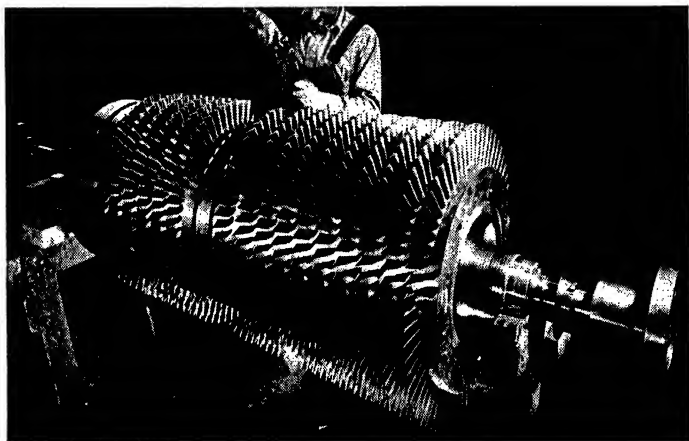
Rotor of an axial flow compressor being bladed. (Courtesy Allis Chalmers Mfg. Co.)
